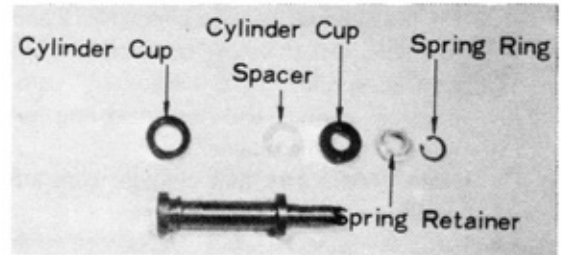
Disassembly of Piston No. 1 and No. 2
